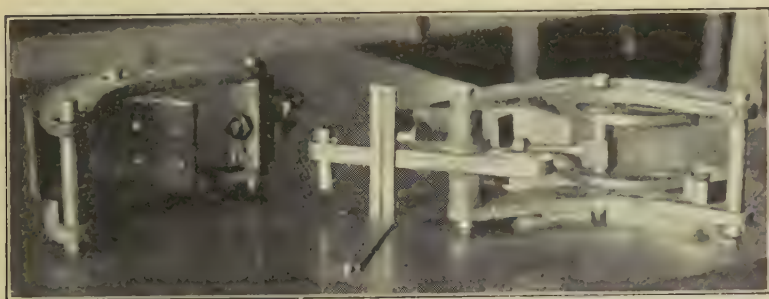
Arc-welded brake shoe for 10-ton crane.
